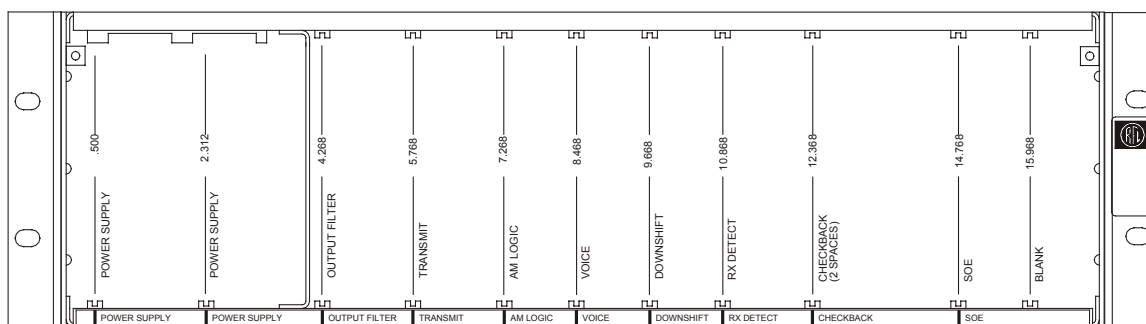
RFL 9785 Chassis Assembly, front view with cover removed
